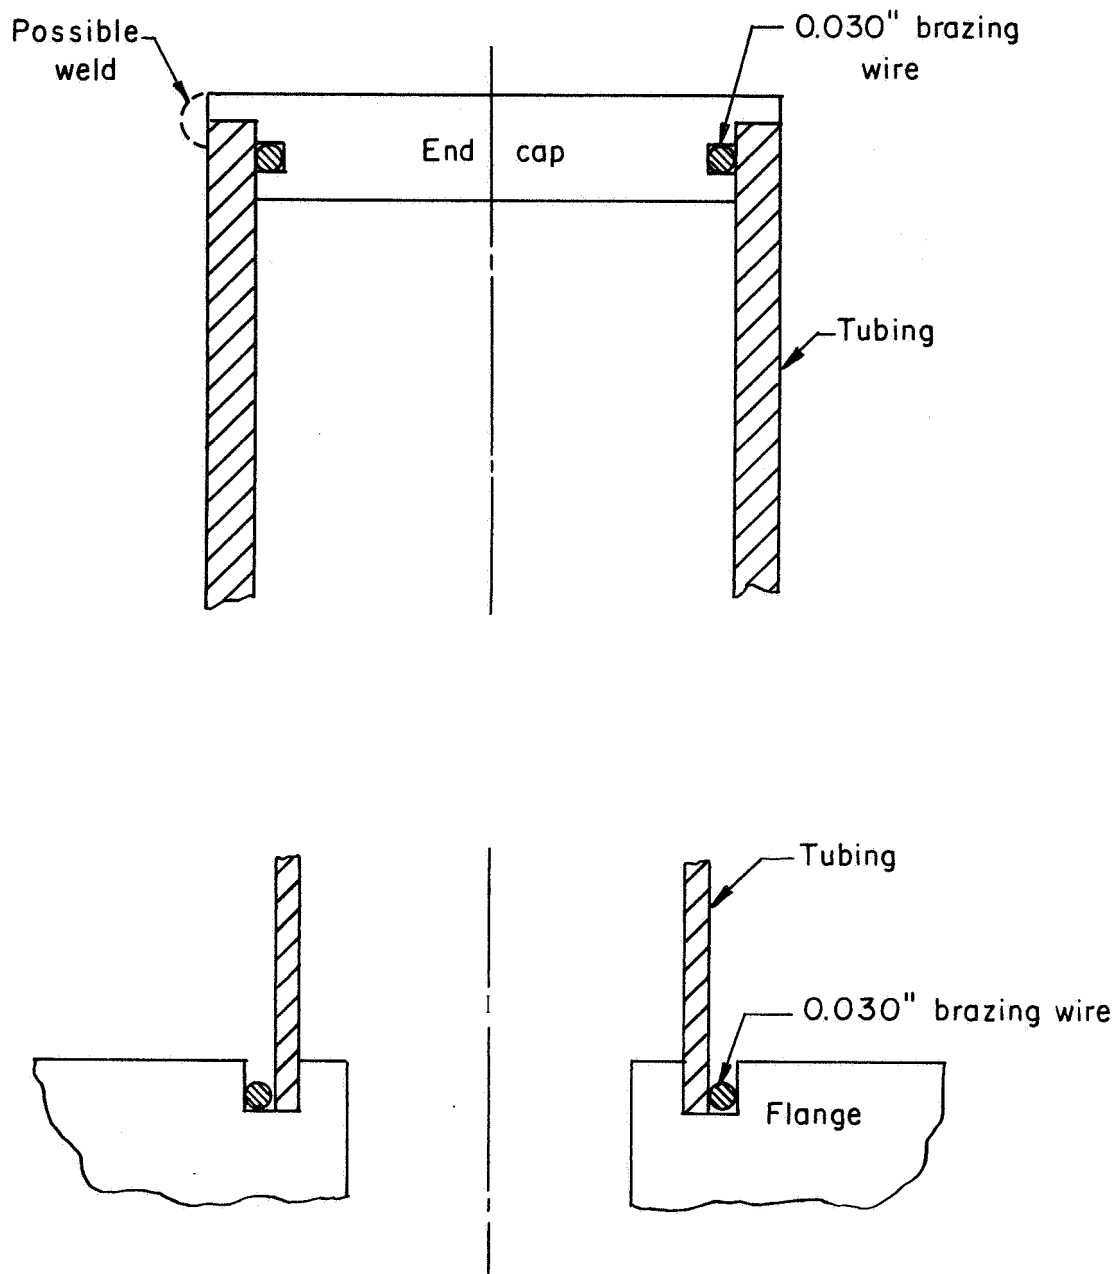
TYPICAL BRAZED JOINTS BETWEEN STAINLESS STEEL TUBING AND FLANGES AND END CAPS FOR VACUUM SERVICE (Ref. 82)
